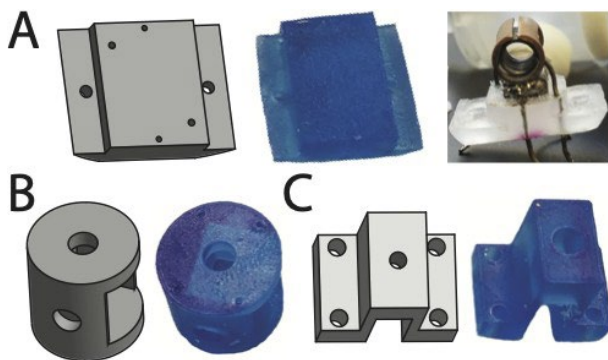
CAD drawings and corresponding 3D-printed parts made using a Formlabs Form 2 SLA printer. A) Coil platform was designed and printed to test compatibility in a commercial spinning assembly before machining the piece out of Kel-F for implementation in the probe. B) Mock spinning assembly body that allows for easily changing coils with the printed platforms for benchtop test of designs. C) Ball-shift adapter used to test RF homogeneity of coil designs. The piece can be manually threaded or completed with a heat-set threaded insert.
